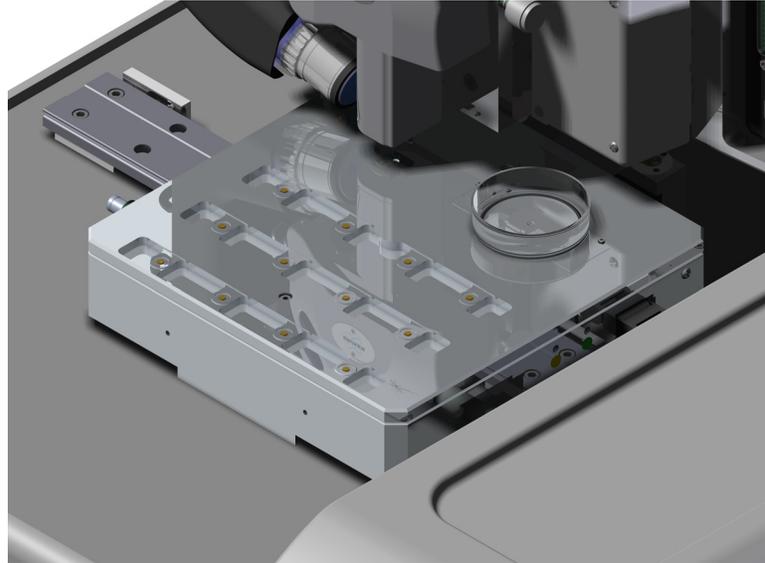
Screw holes to attach the Multi-Sample Chuck to the chuck base
